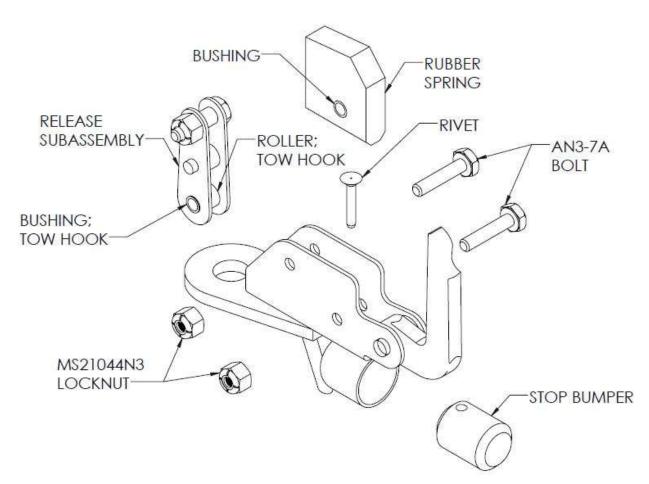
Tow Hook Assembly, P/N: 6030 - Exploded View
